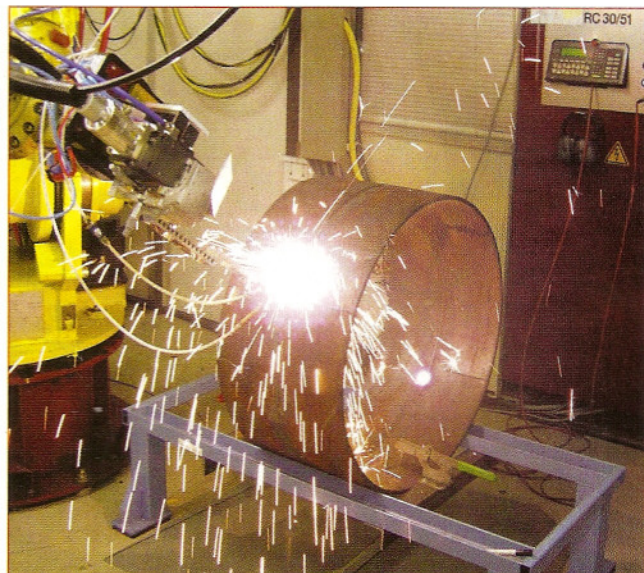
Girth welding of pipe segments with the fiber laser YLR-17000. (Photo courtesy of BLAS GmbH.)
